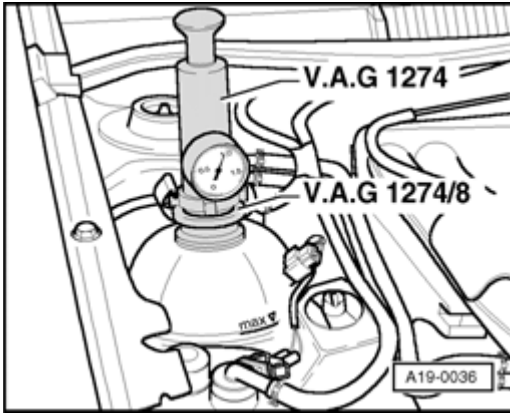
Attaching VAG1274 Cooling System Tester Together With VAG1274/8 Adapter To Coolant Expansion Tank
